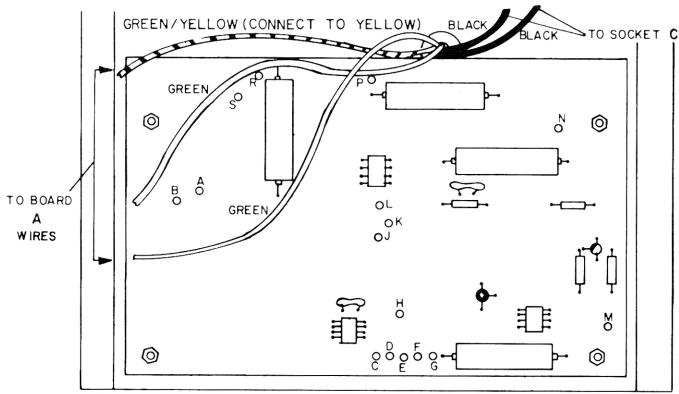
Circuit Board 118160 and Transformer Wiring Page 5 of 12
